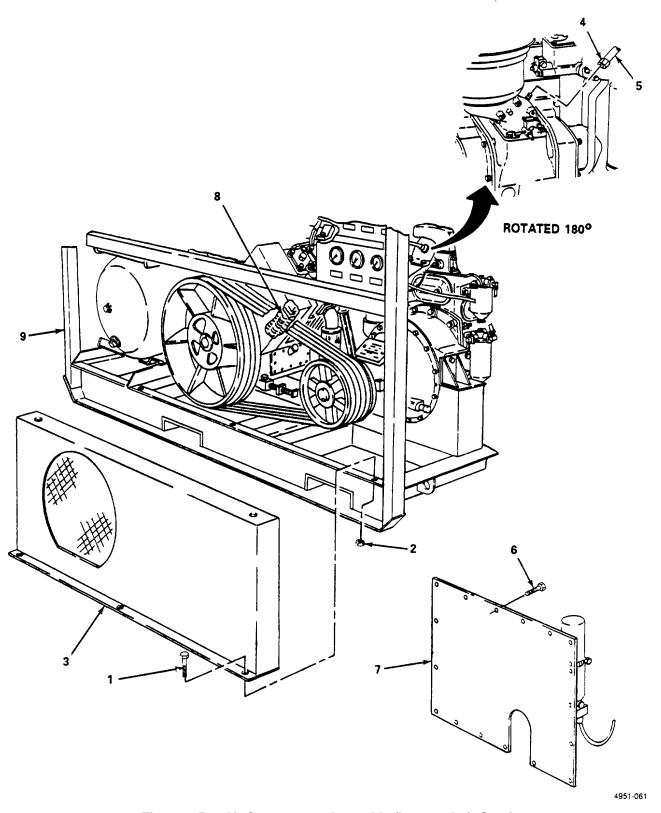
Air Compressor Assembly (Intercooler), Service.
